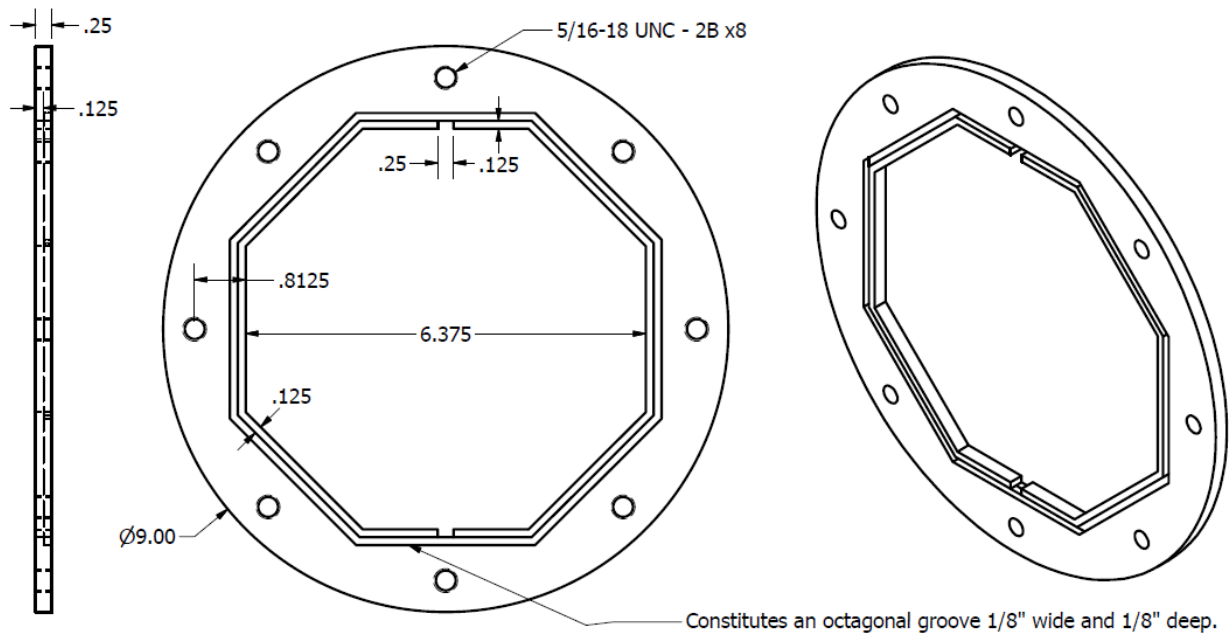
Wind tunnel extension flange plates. Interior is a regular octagon. One flange manufactured with threads, the other was manufactured with 5/16" thru holes. Measurements in inches.
